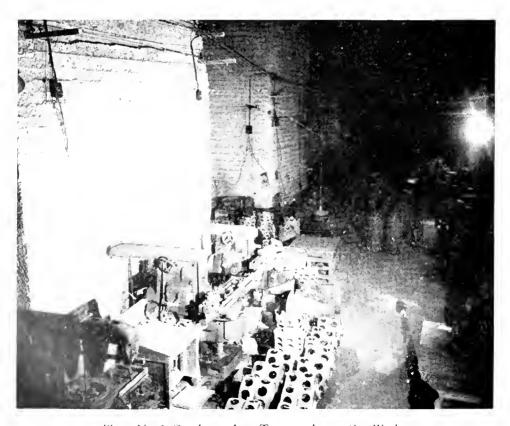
Crankcase shop, Tomura plant at Oya Works.
